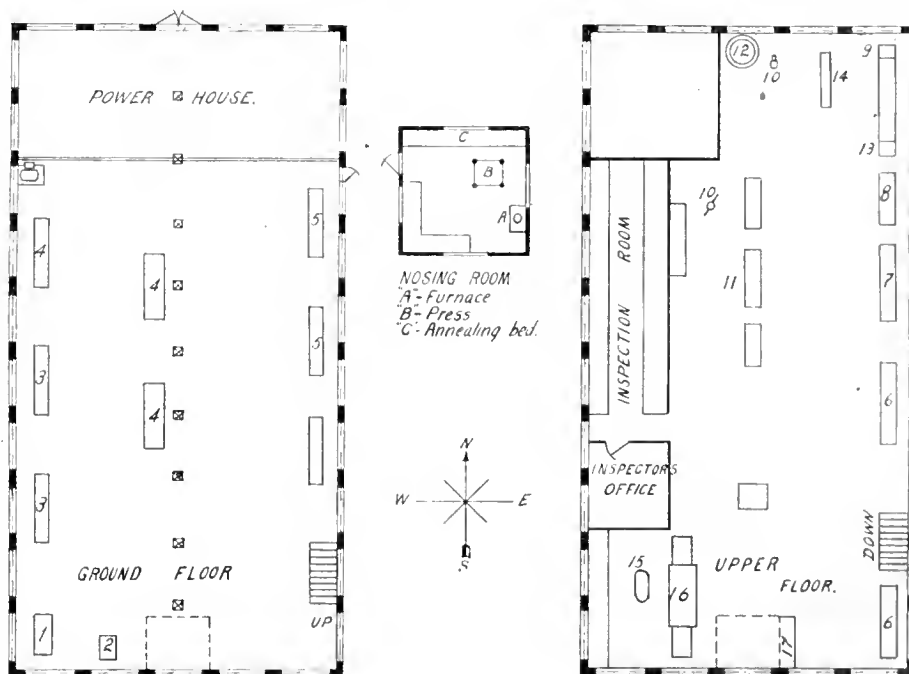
LAYOUT OF PLANT SHOWING LOWER AND UPPER FLOORS.
